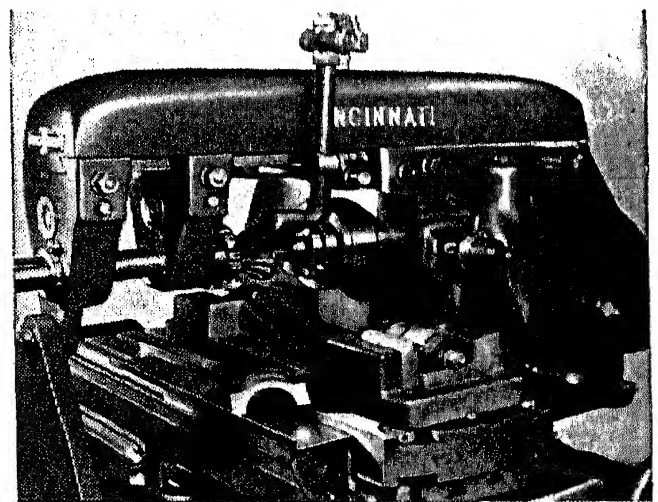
An index base with duplicate fixtures on the table of a plain Hydromatic milling machine. (Courtesy The Cincinnati Milling Machine Co.)
